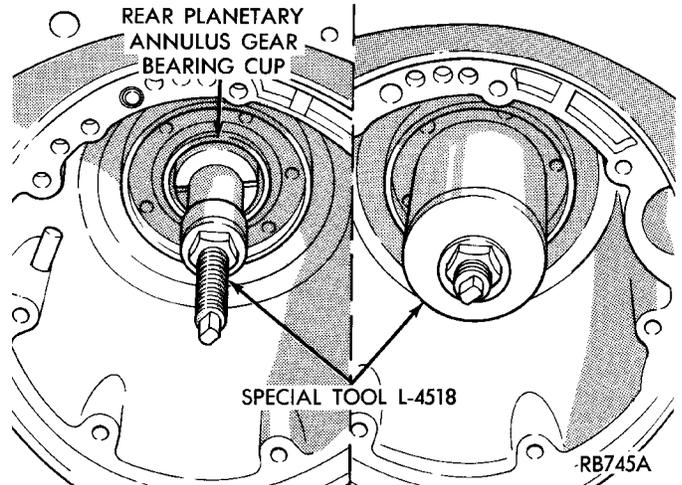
Remove Rear Planetary Annulus Gear Bearing Cup
